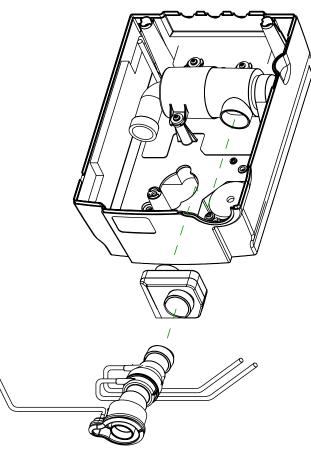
FIGURE L: REMOVAL AND INSTALLATION OF THE OUTLET-FLOW TUBING
